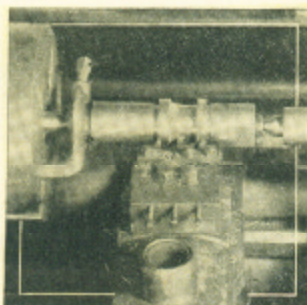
A 16-inch Lathe Equipped with Triple Tool Block.
